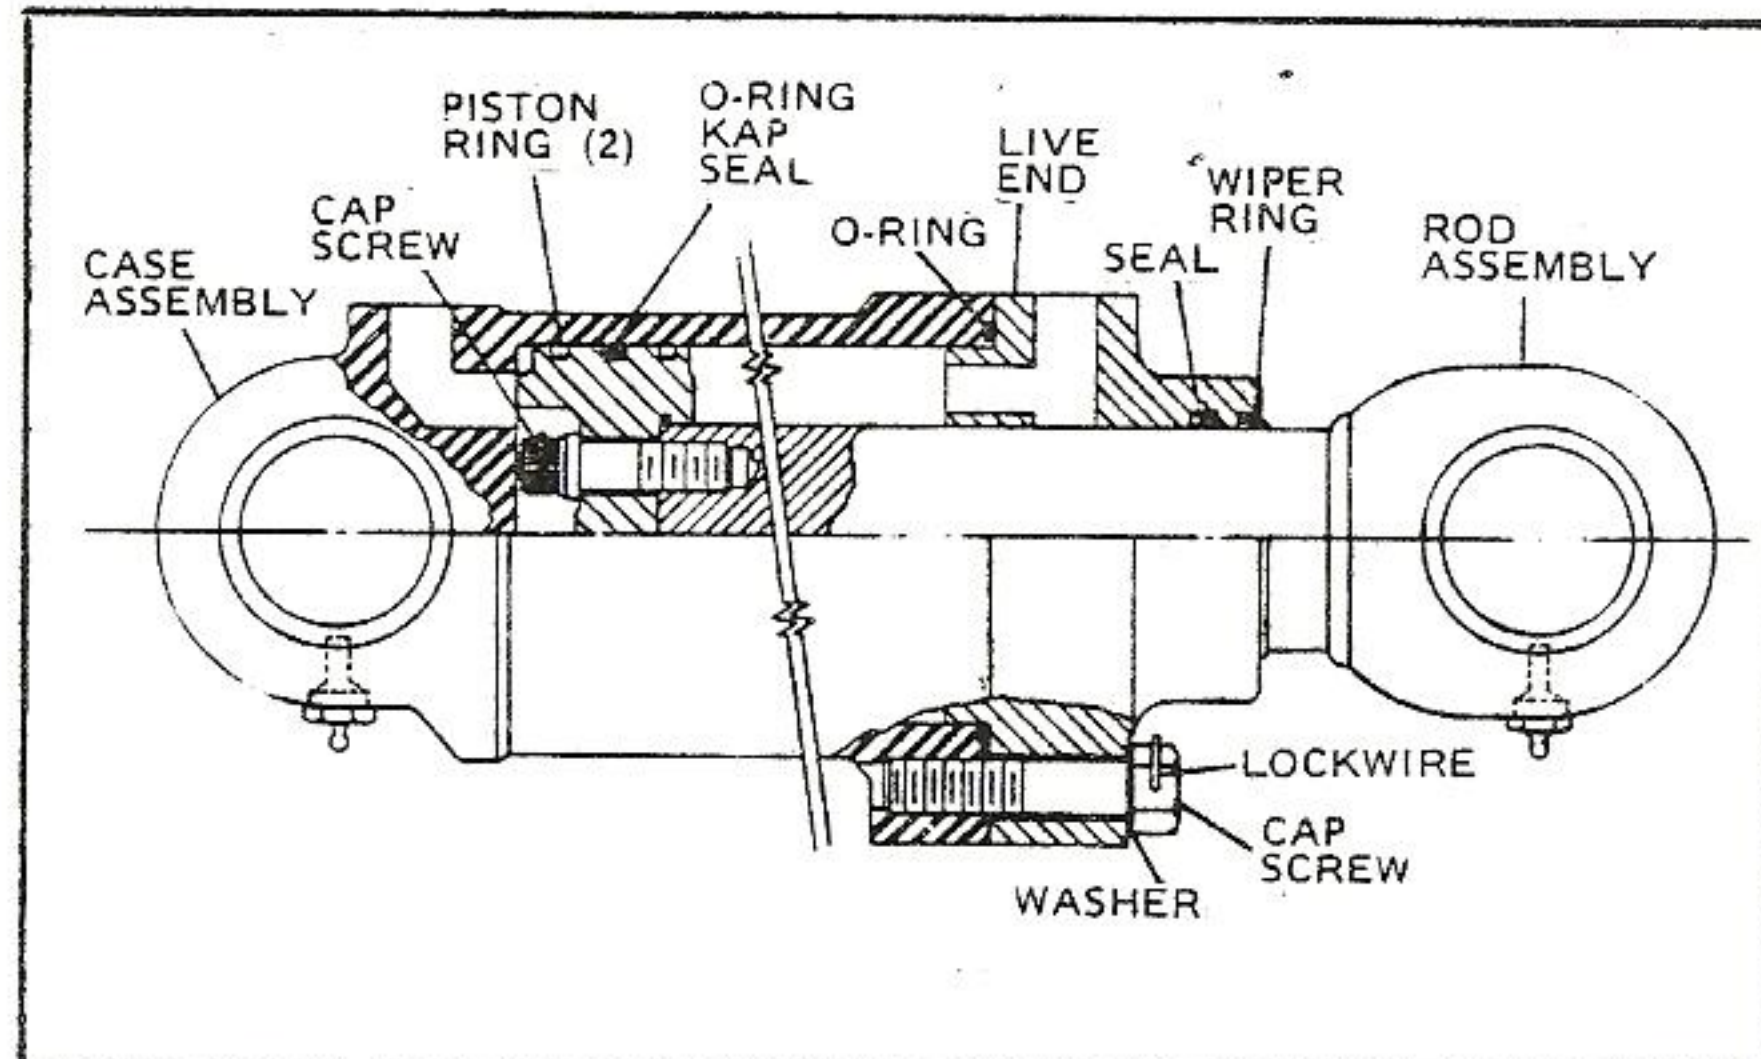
26. HYDRAULIC CYLINDER CROSS SECTION
